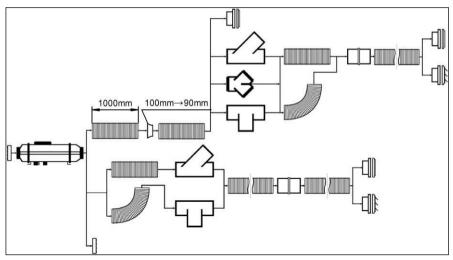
Air duct connections for AIR-9D (100 mm/90 mm)
